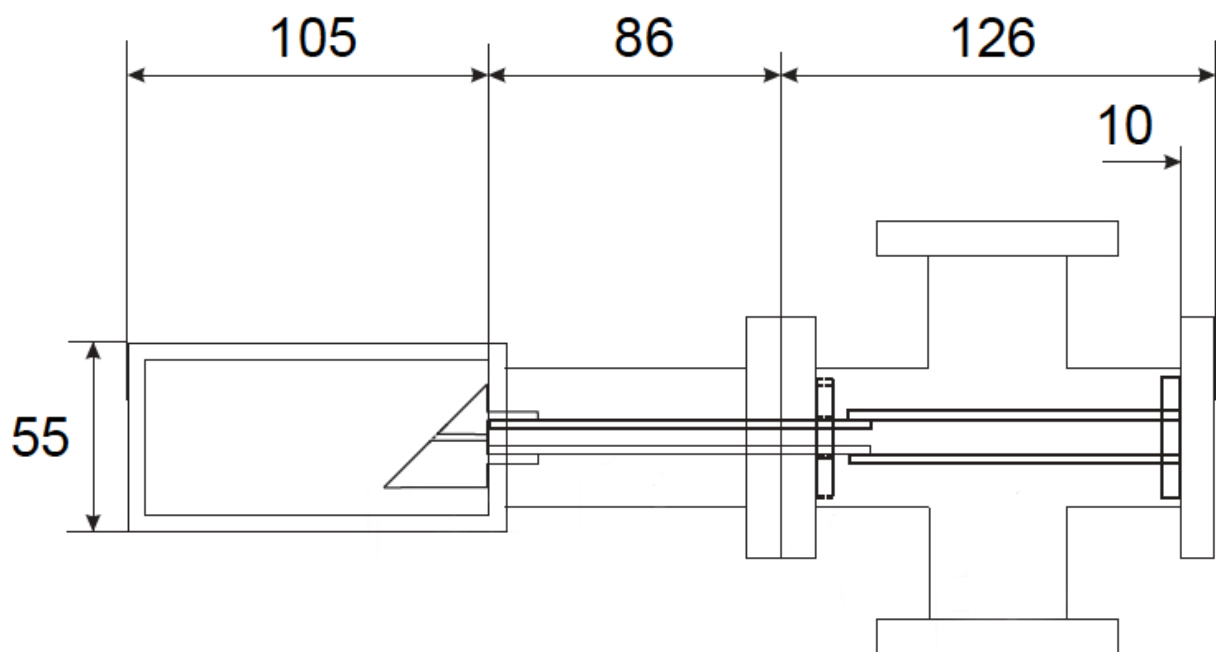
2D-MOT chamber with differential pumping tube inside (dimensions in millimeters). The differential pumping tube consists of three joined pipes: the cylinder hole in the mirror of 2 mm diameter and 20 mm length, a tube of 5 mm diameter and 116 mm length, and a tube of 10 mm diameter and 86 mm length.
